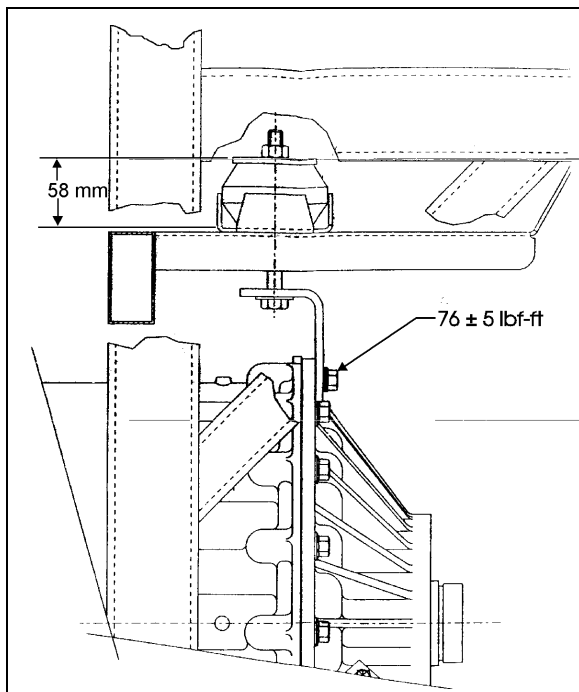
RUBBER DAMPER TOLERANCE
